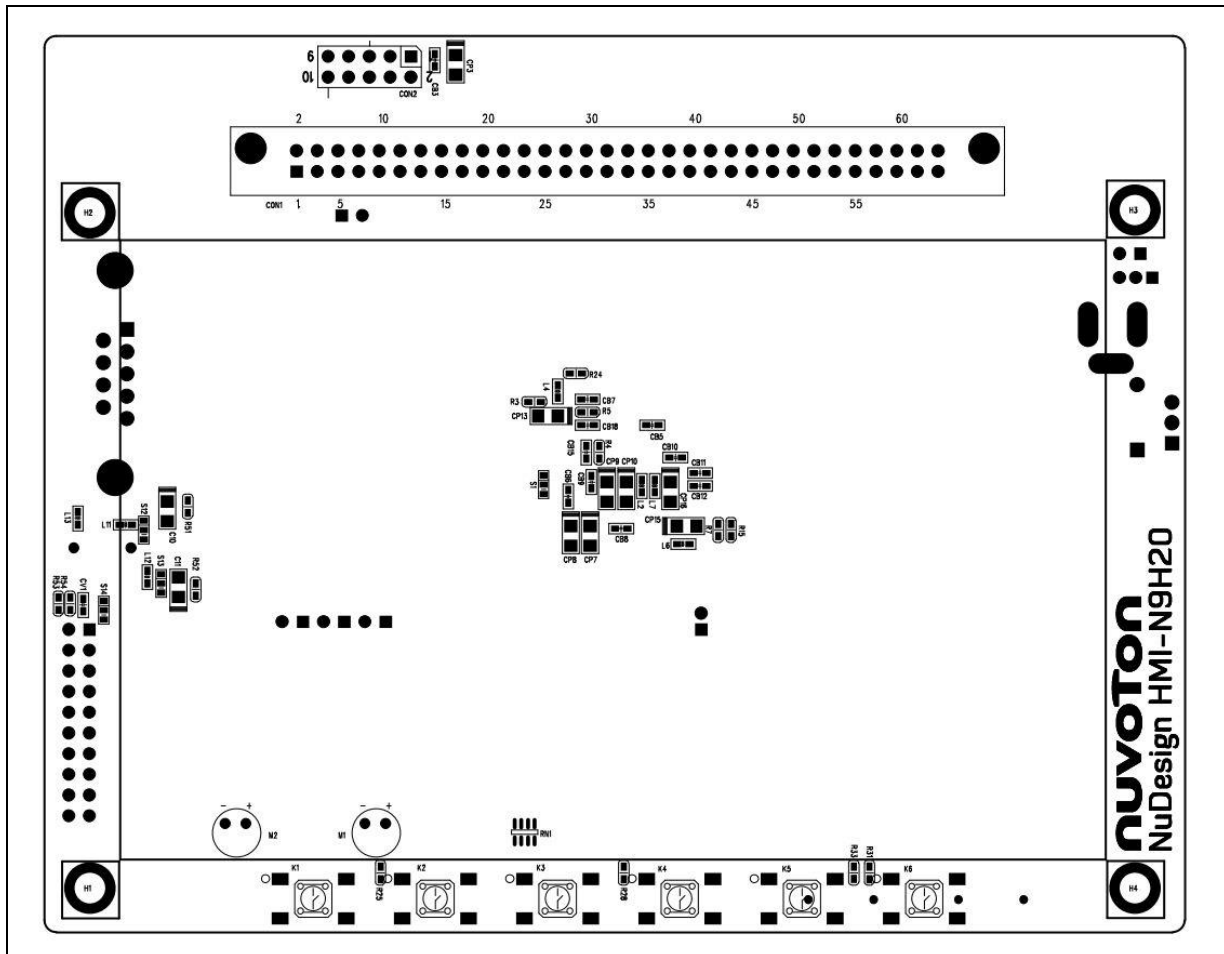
NuMaker-emWin-N9H20 PCB Placement (Front)
